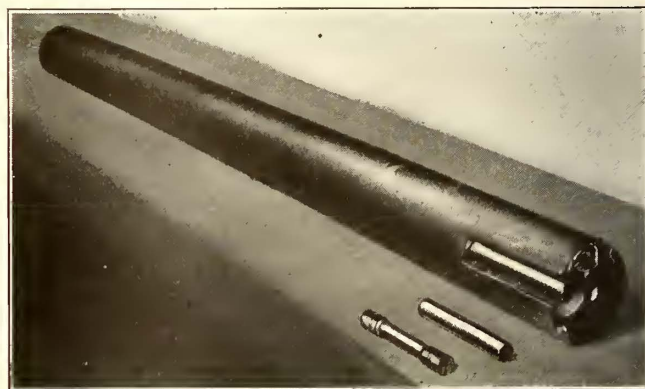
TEST SPECIMENS REMOVED FROM SPECIAL ALLOY STEEL FOR SHAFTS
